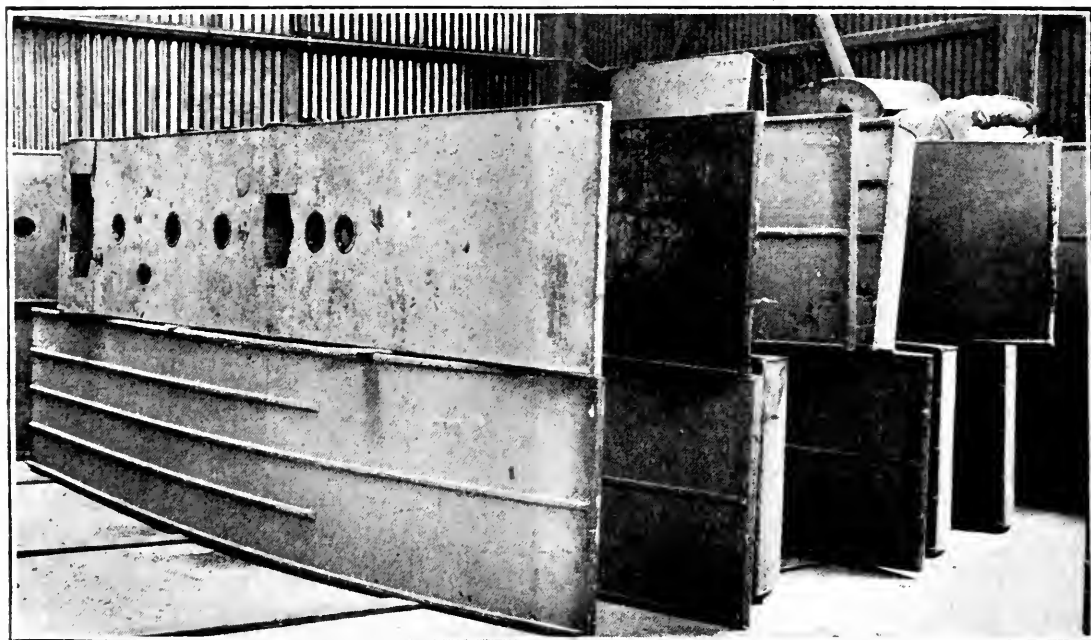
Seaplane Floats in Store showing inspection covers removed.
